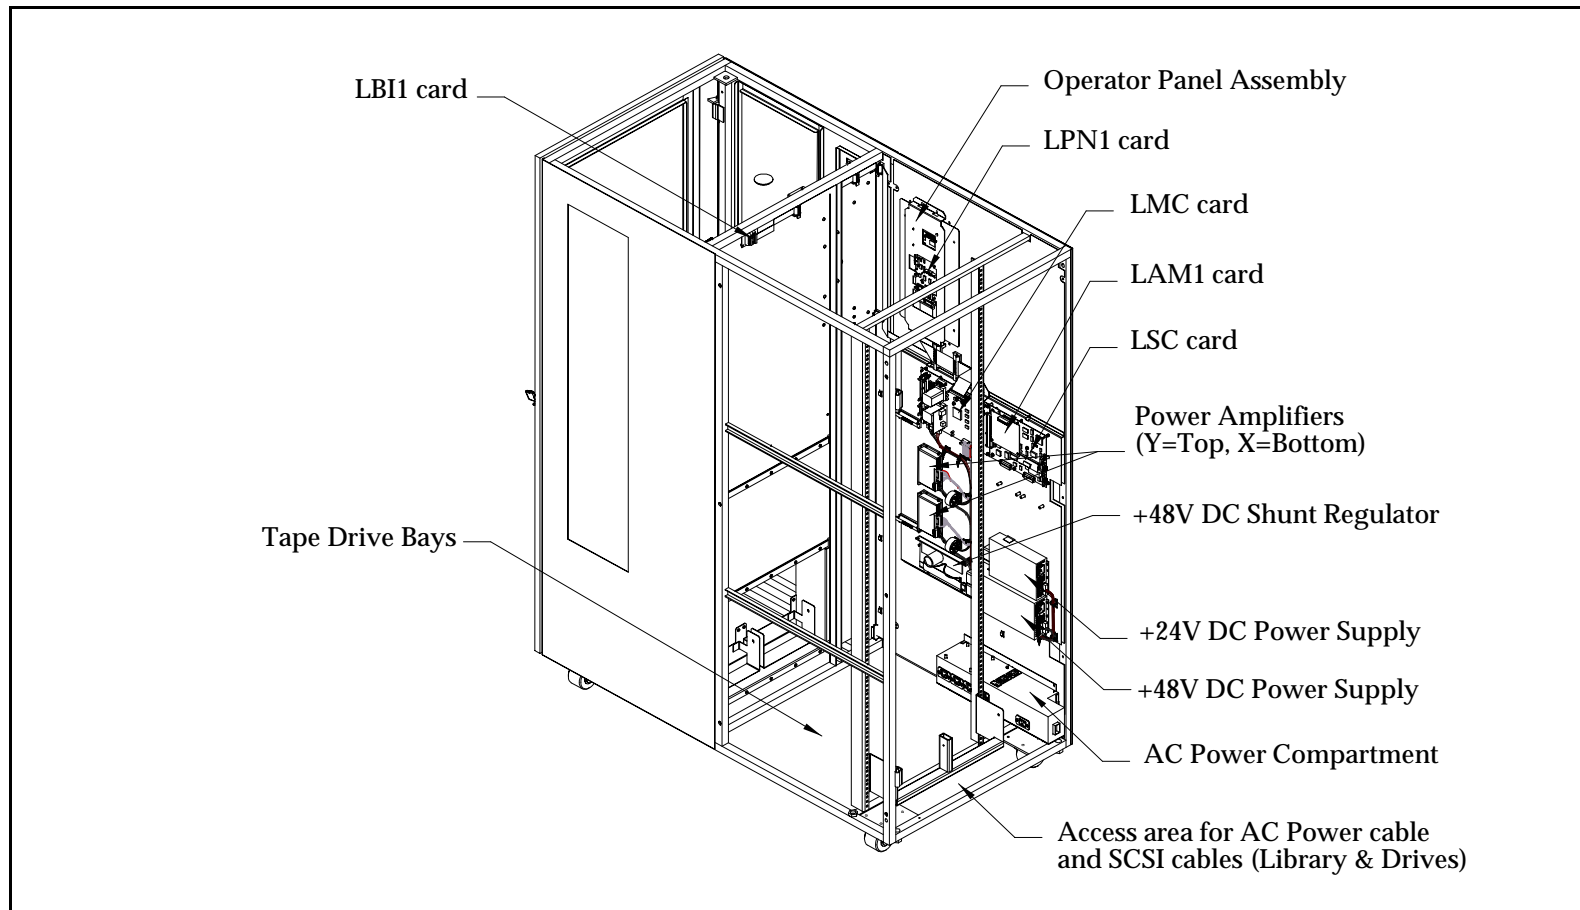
Front View of Control Module Model C10 with Front Door and Front Side covers removed
